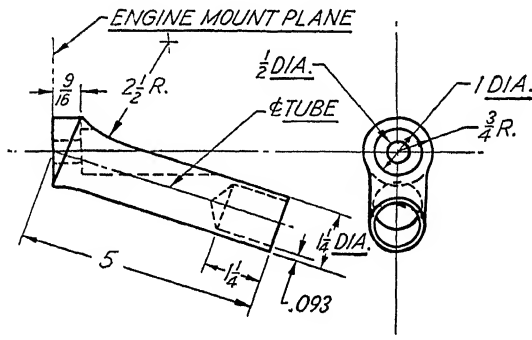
Fitting—engine mount forward upper inboard.
